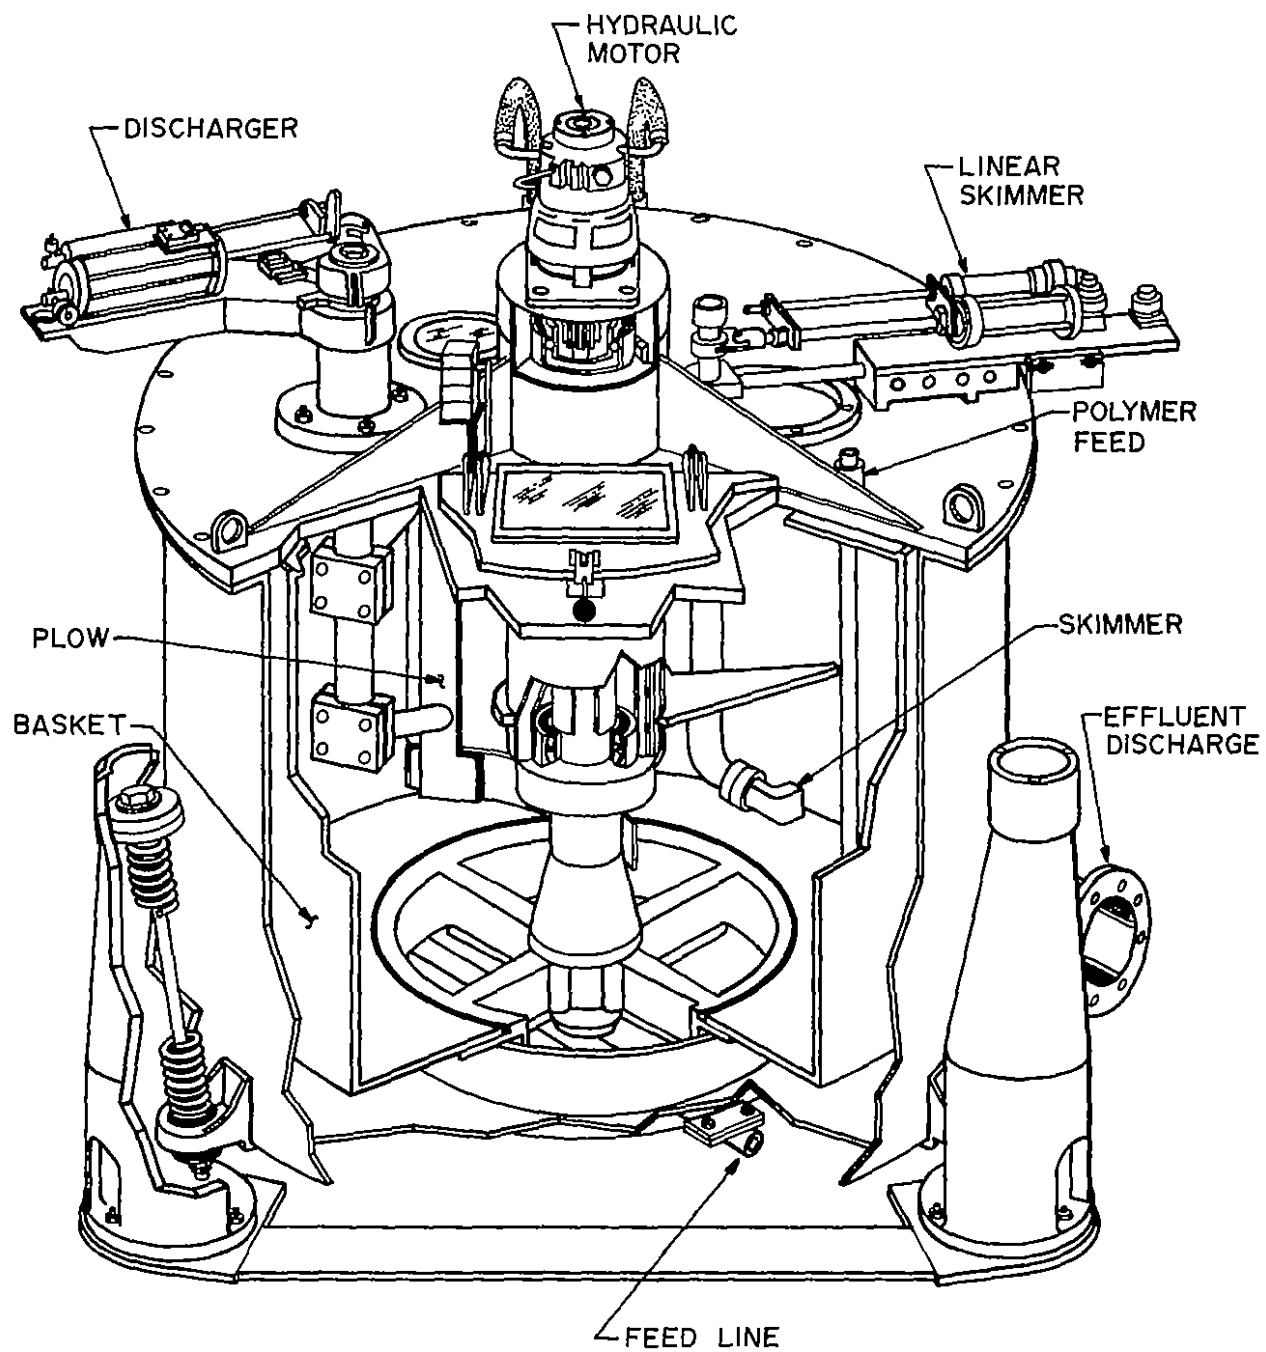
121.0 cm (48 in.) basket centrifuge - section view
